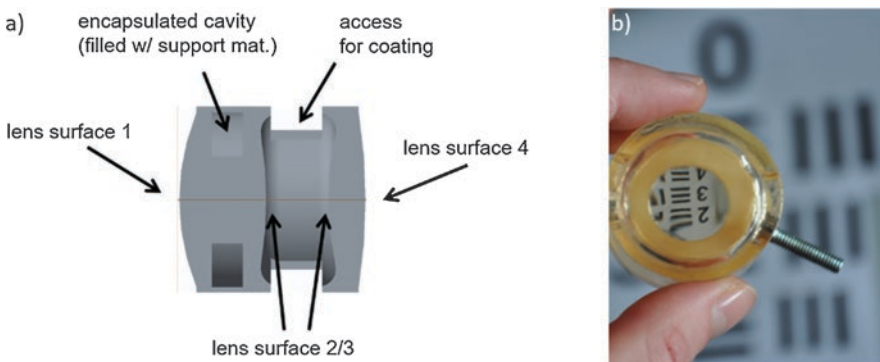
Additively manufactured doublet. (a) Basic structure; (b) 3D-printed optical component
